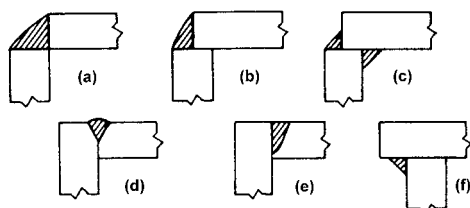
Corner joints. (a), (b), (c), and (f) Fillet welds. (d) V-groove weld. (e) J-groove weld
